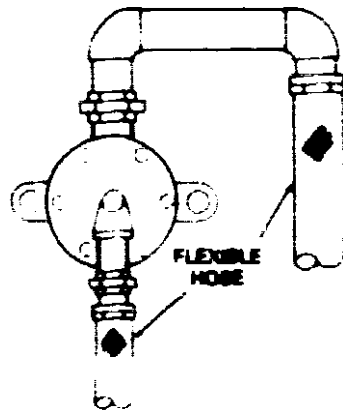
Recommended use of flexible hose to install Type N Joints on Dryers, Cylinders or Rolls.
